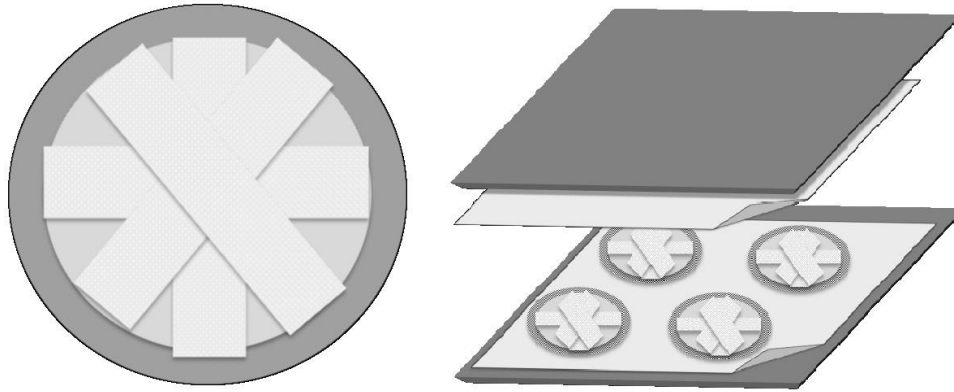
Polymer film in press mould and moulds between metal plates [2]
